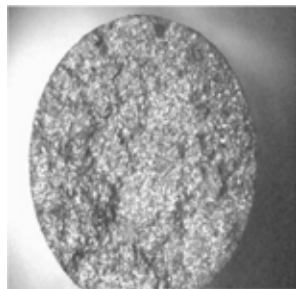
Cast iron fracture surface (112.3 MPa; 7.69E8 cycles).
